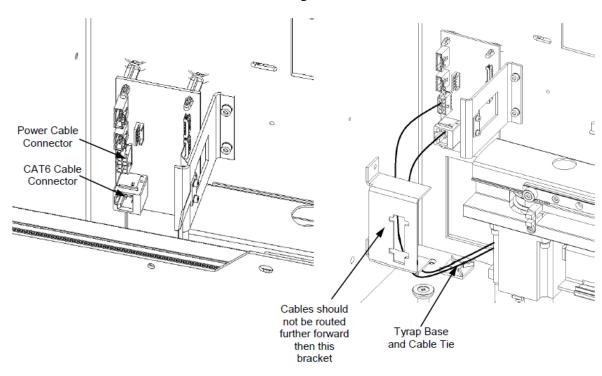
Pipette Drive, X Drive Printed Circuit Board
